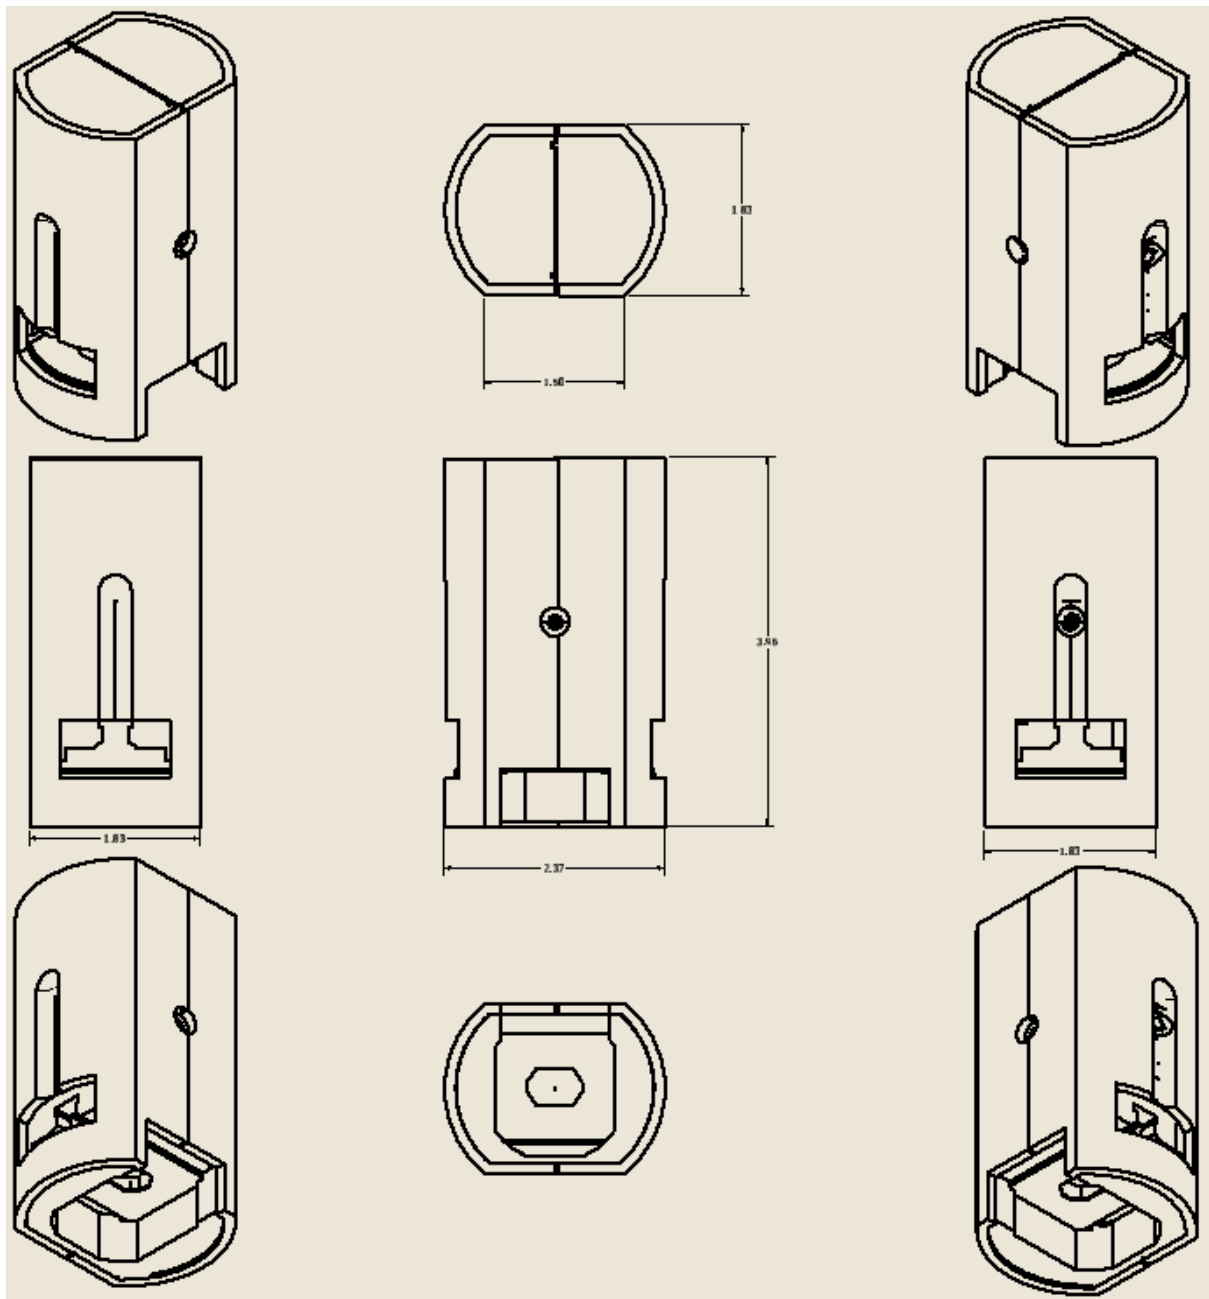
Appendix; Technical Drawing (Prototype LDHM device)
